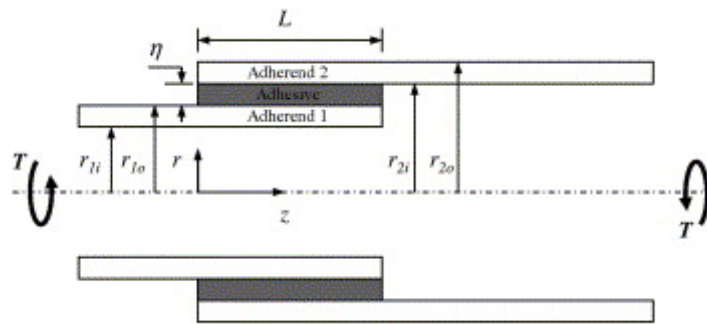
Schematic representation of one of the typical tubular bonded joints geometry bonded scarf joints and stepped joints [99]
